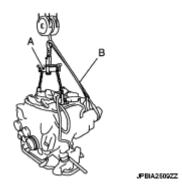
Hoisting Engine Assembly Using Webbing Slinger Courtesy of NISSAN MOTOR CO., U.S.A.
